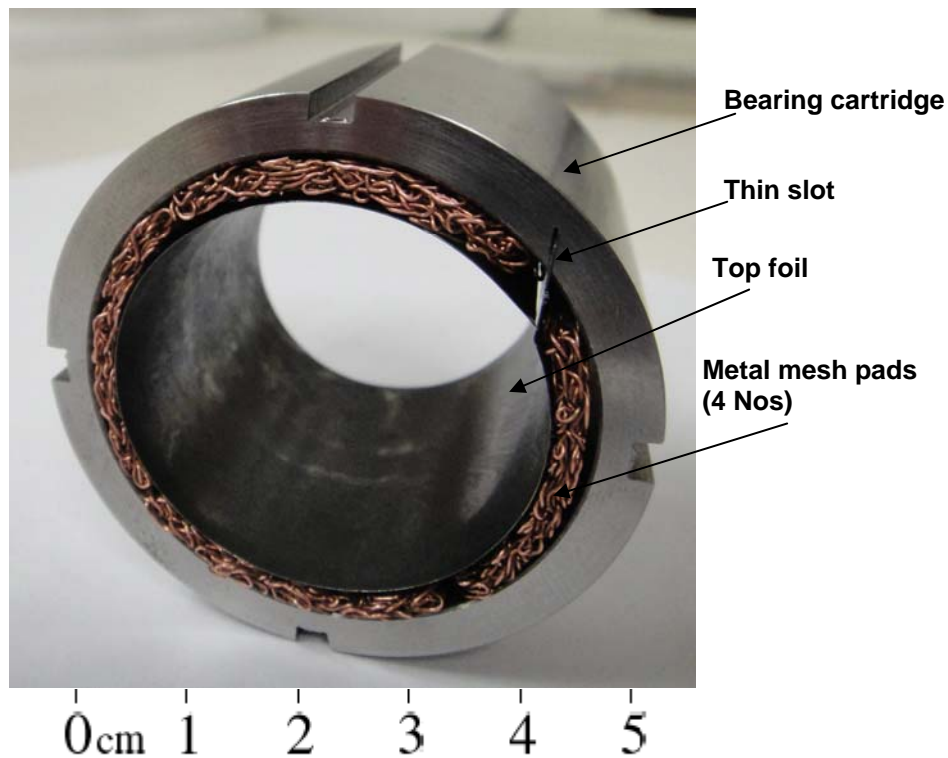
Metal mesh foil bearing with four metal mesh pads
